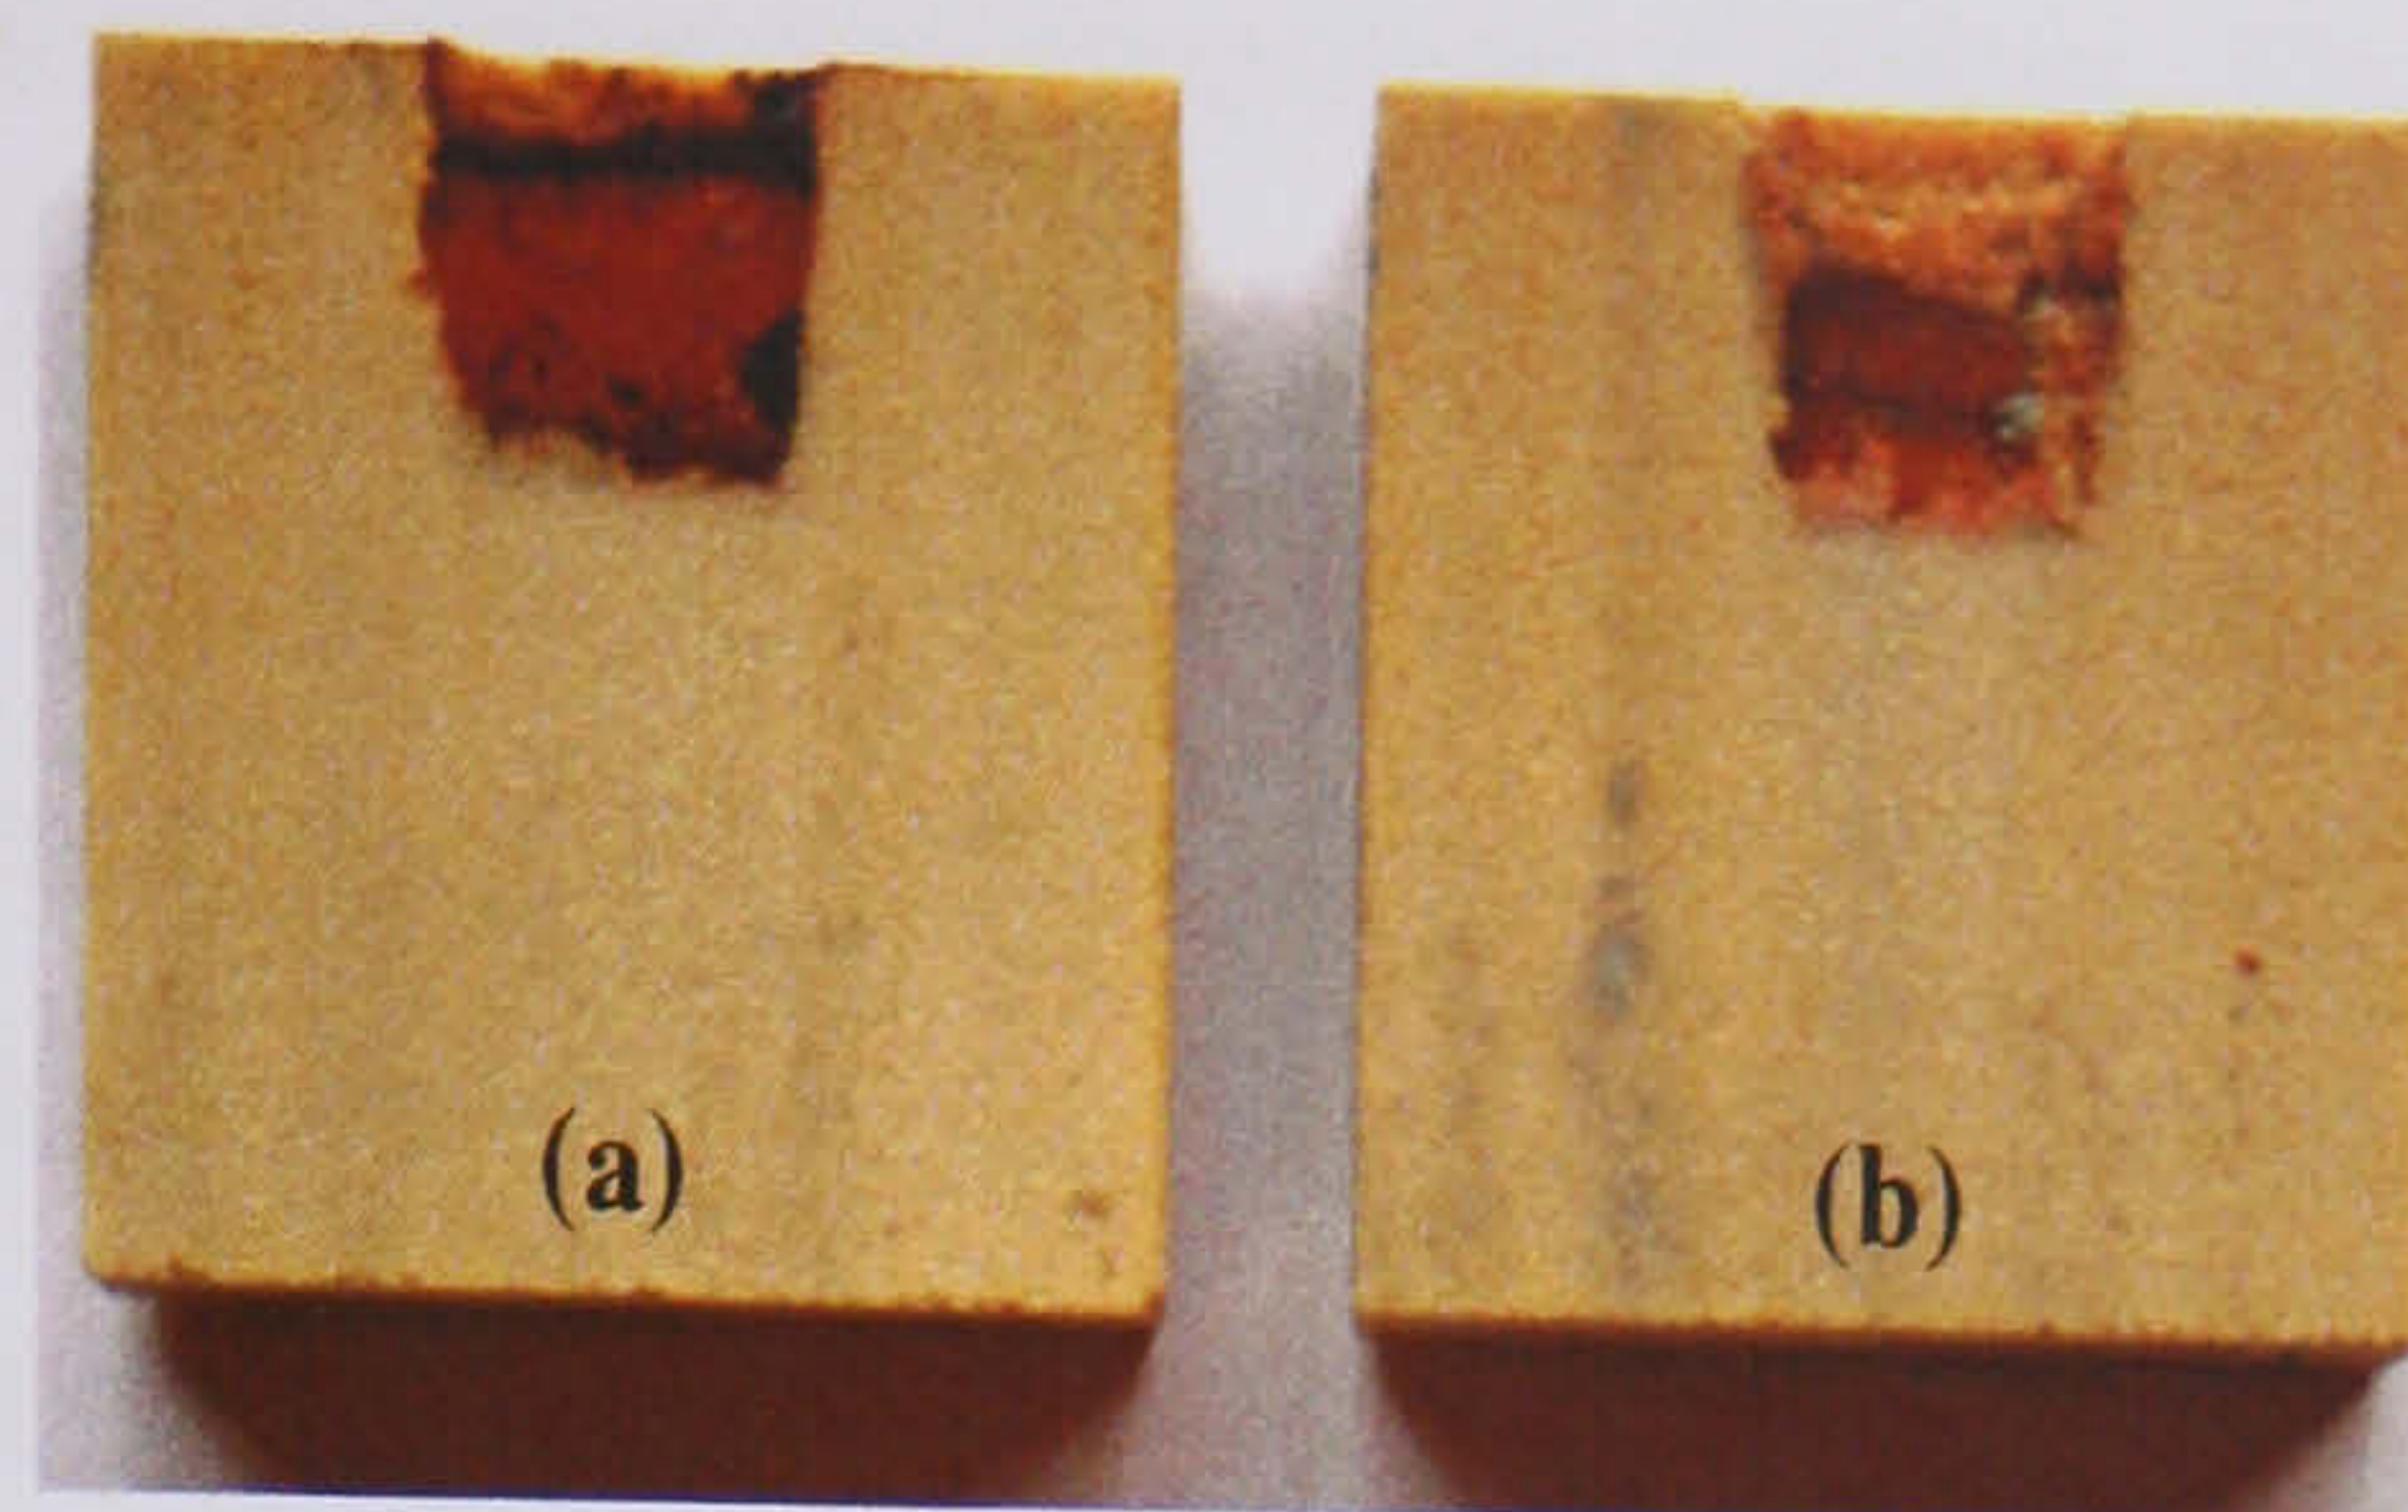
Specimen samples after ultrasonic cutting with a 35 kHz blade under constant cutting speeds of (a) 20 mm/min and (b) 150 mm/min.
